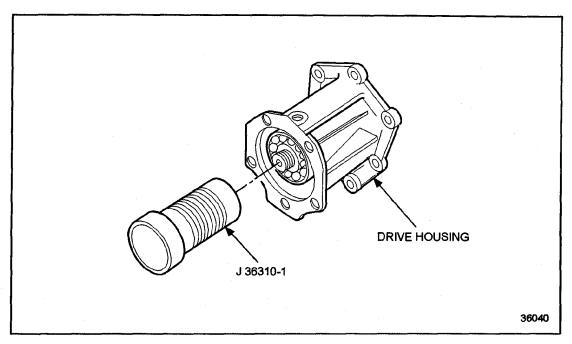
Air Compressor Drive Shaft Installation (Former Design)
